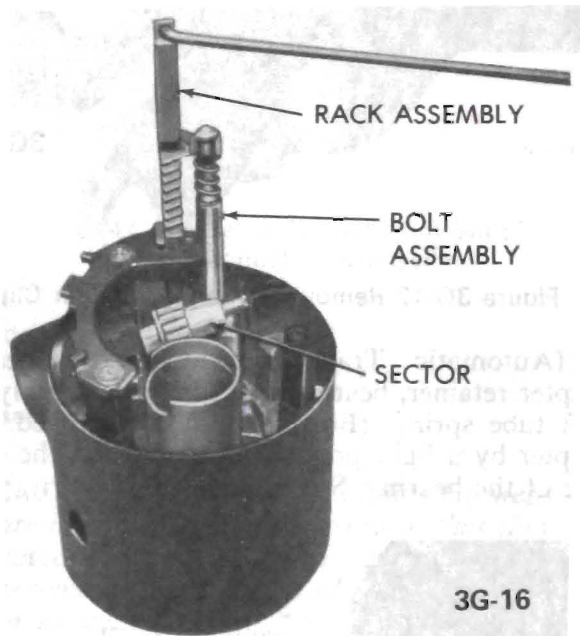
G-36 Removing or Installing Rack and Lock Bolt
